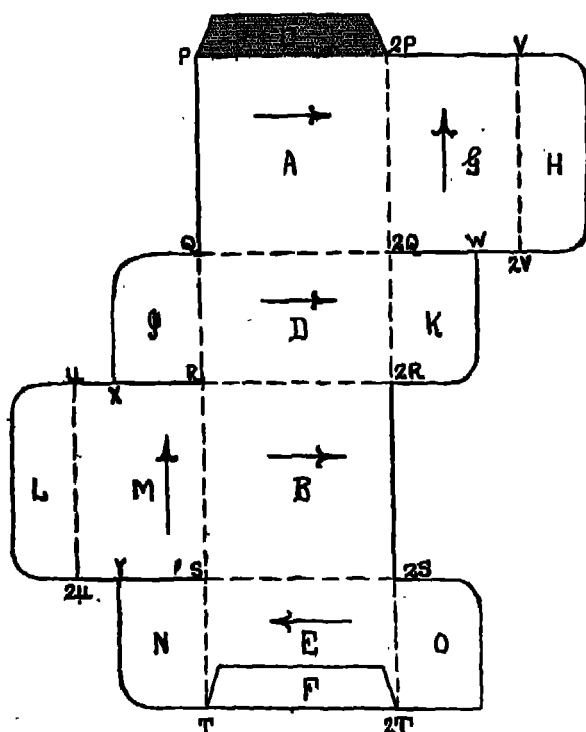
SINGLE-PIECE ELECTRICAL ACCESSORY EXAMPLE.
